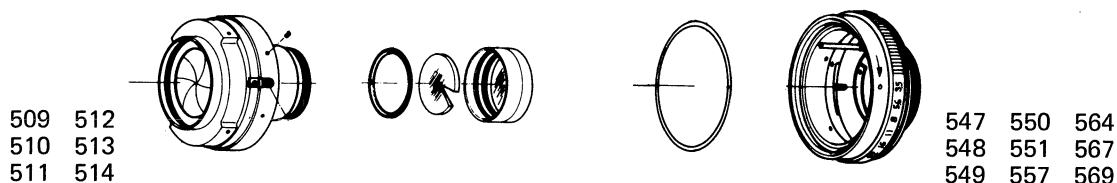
A. Diaphragm Housing Assemblies and Mount Assemblies
